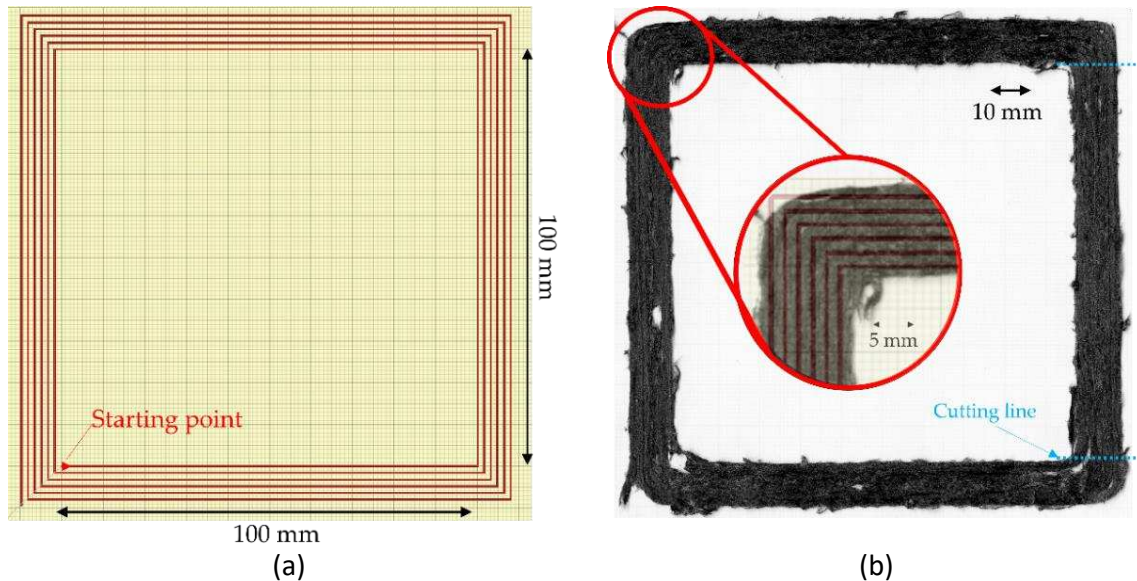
(a) Printing path of large square shape with 90° sharp turning corners to produce four tensile samples starting from inside; (b) top surface of the sharp corner printed part with a zoom-in of a corner.
